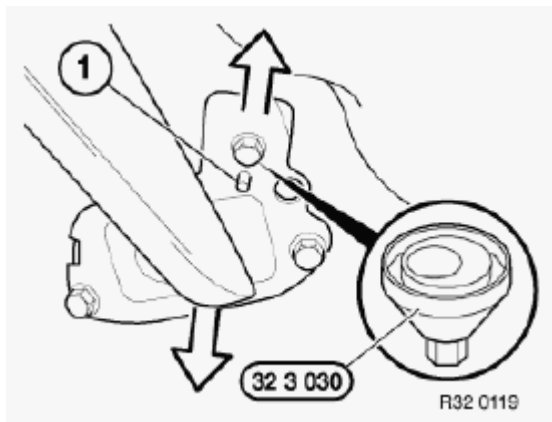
Special Tool (32 3 030) And Bolt Head And Pin
